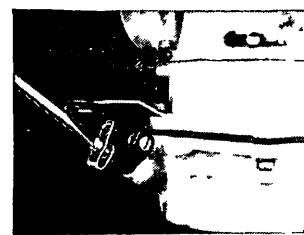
Install terminal cap, hold down clip and cap attaching screw
